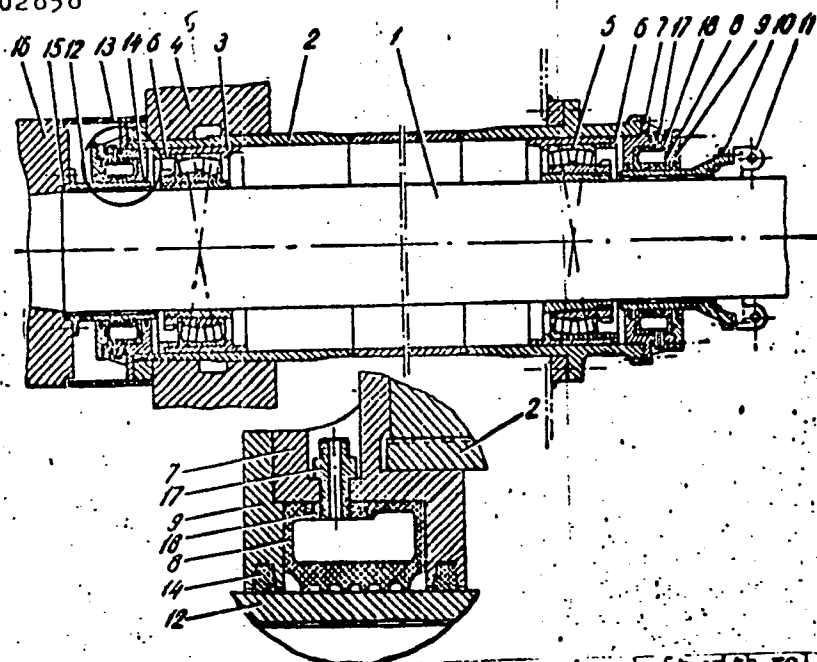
Bearing arrangement of a stern-tube shaft with rolling bearings and packing involving the use of a circular elastic cylinder
